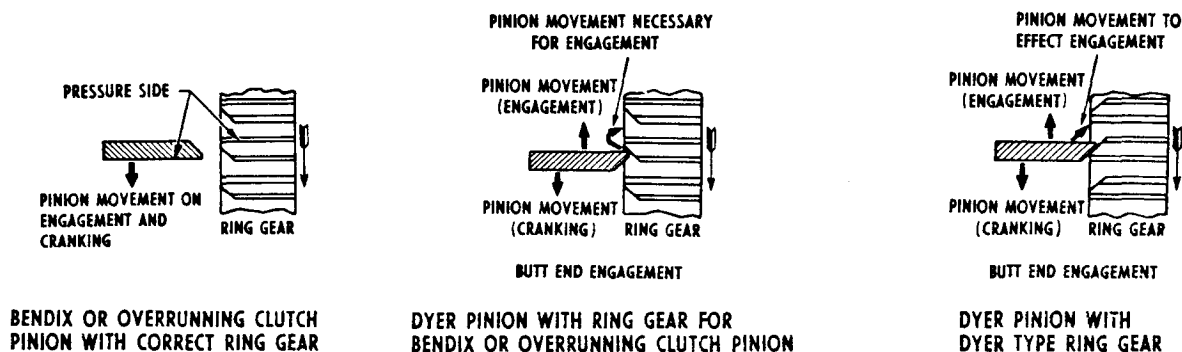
Action of Dyer drive type pinion in engaging with flywheel teeth of different chamfers.
